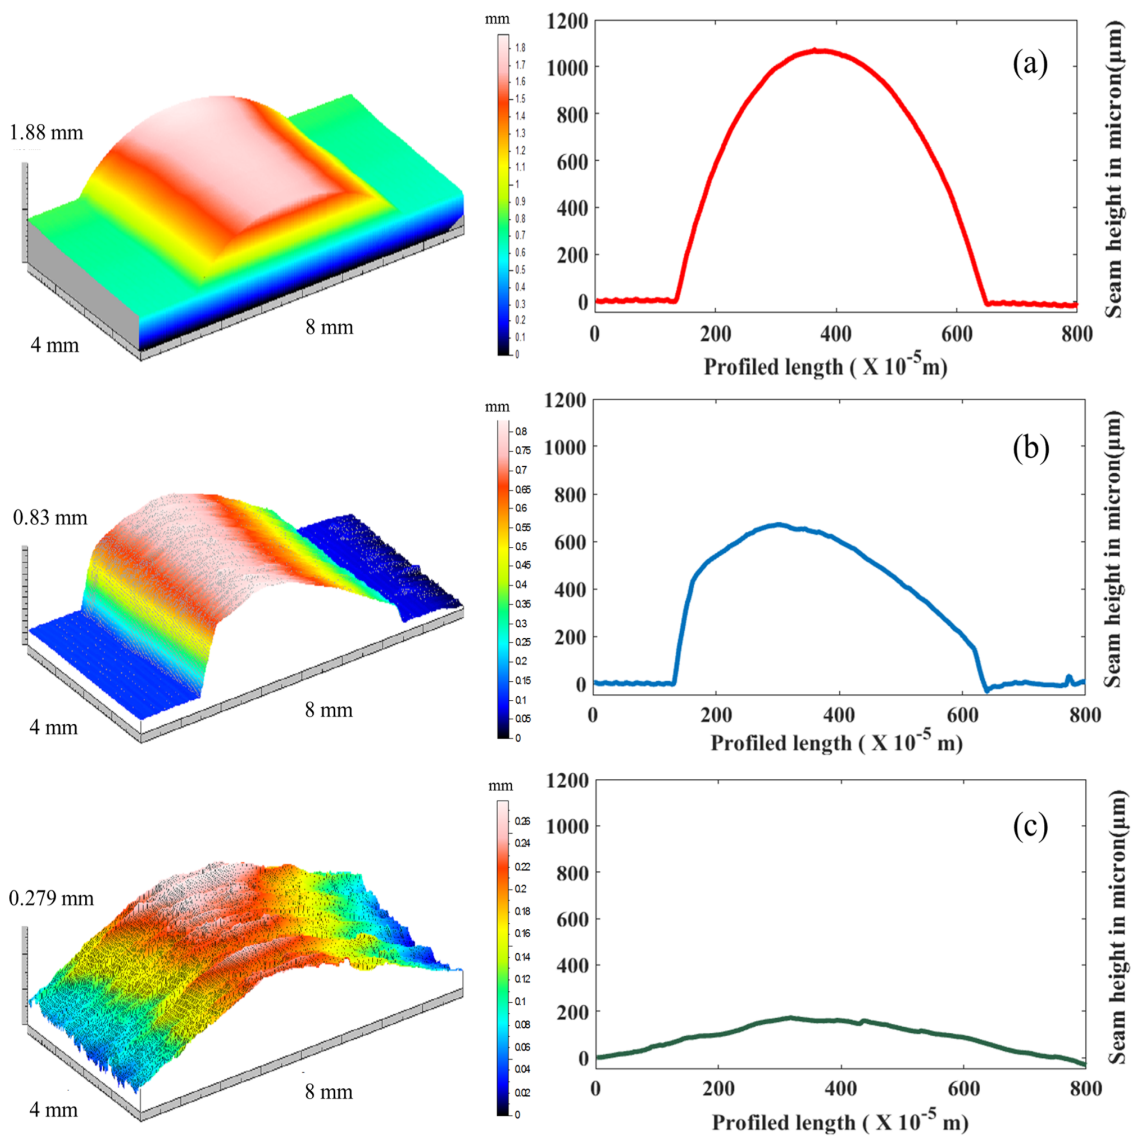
(a) 3D and 2D profile extracted from the weld seam before belt grinding process. (b) 3D and 2D non-symmetrical profile extracted from the weld seam after consecutive passes of belt grinding process (State-1). (c) 3D and 2D profile extracted when the weld seam is distinctively removed (State-2).
